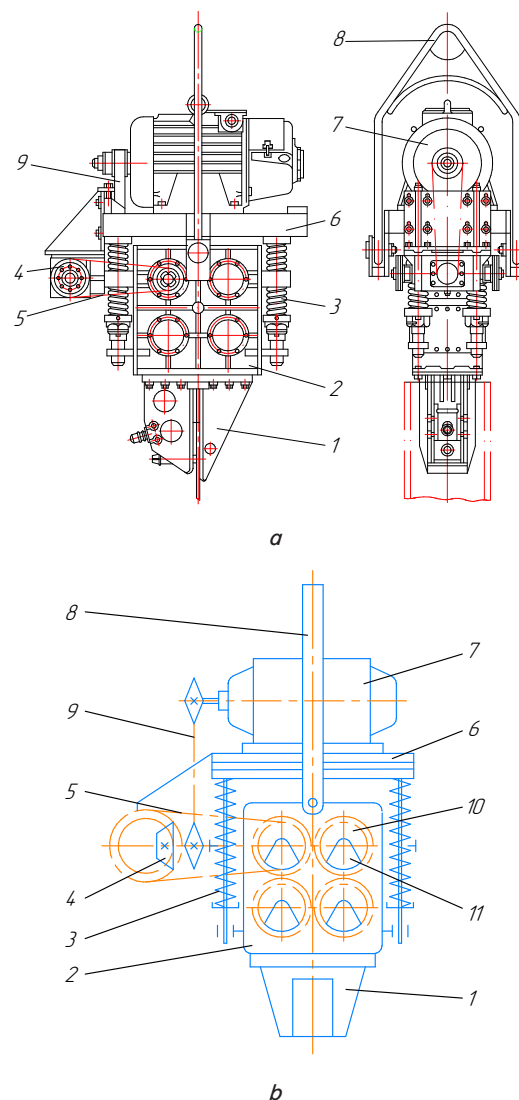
General view of a vibratory pile driver with sprung loading: *a* – general view of the vibratory pile driver; *b* – schematic representation of the vibratory pile driver; 1 – pile head; 2 – vibrator; 3 – springs; 4 – bevel gearbox; 5 – horizontal chain drive; 6 – loading plate; 7 – electric motor; 8 – suspension; 9 – vertical chain drive; 10 – gears; 11 – unbalance shafts
